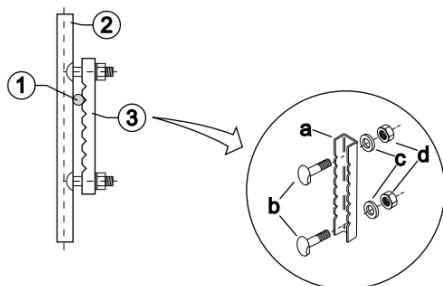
Rung Mounting Assembly (P/N 506273 GALV.)
